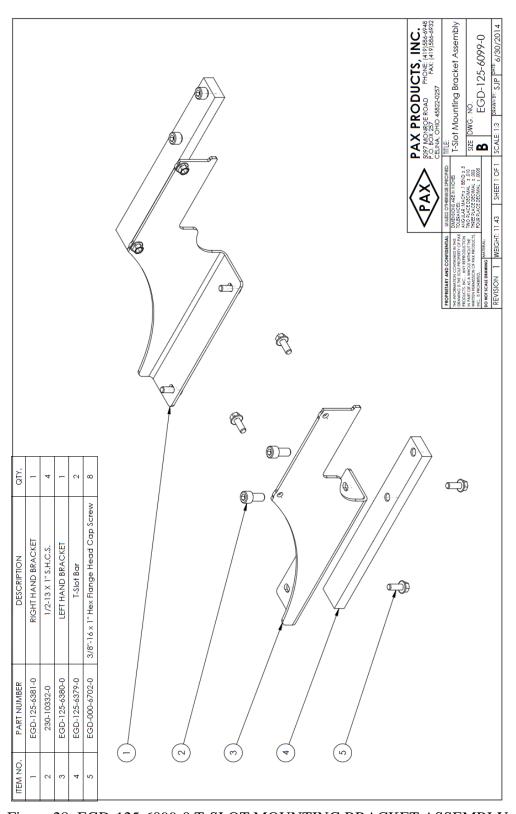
EGD-125-6099-0 T-SLOT MOUNTING BRACKET ASSEMBLY
